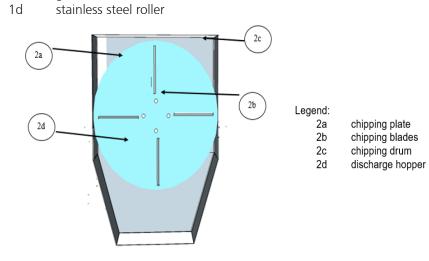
Sectional front view of the chipping assembly (Note: Not Drawn to Scale)
